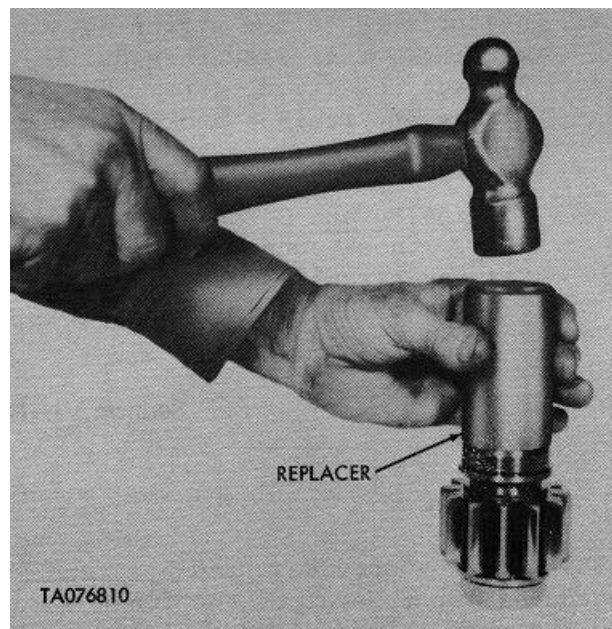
Inner Race of Bearings Pressed onto Pinion Gear Shaft
